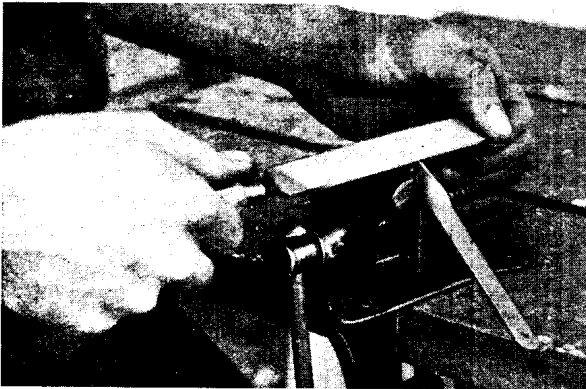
When filing brass components an ordinary 8 in. second cut file held as shown is best for the purpose
